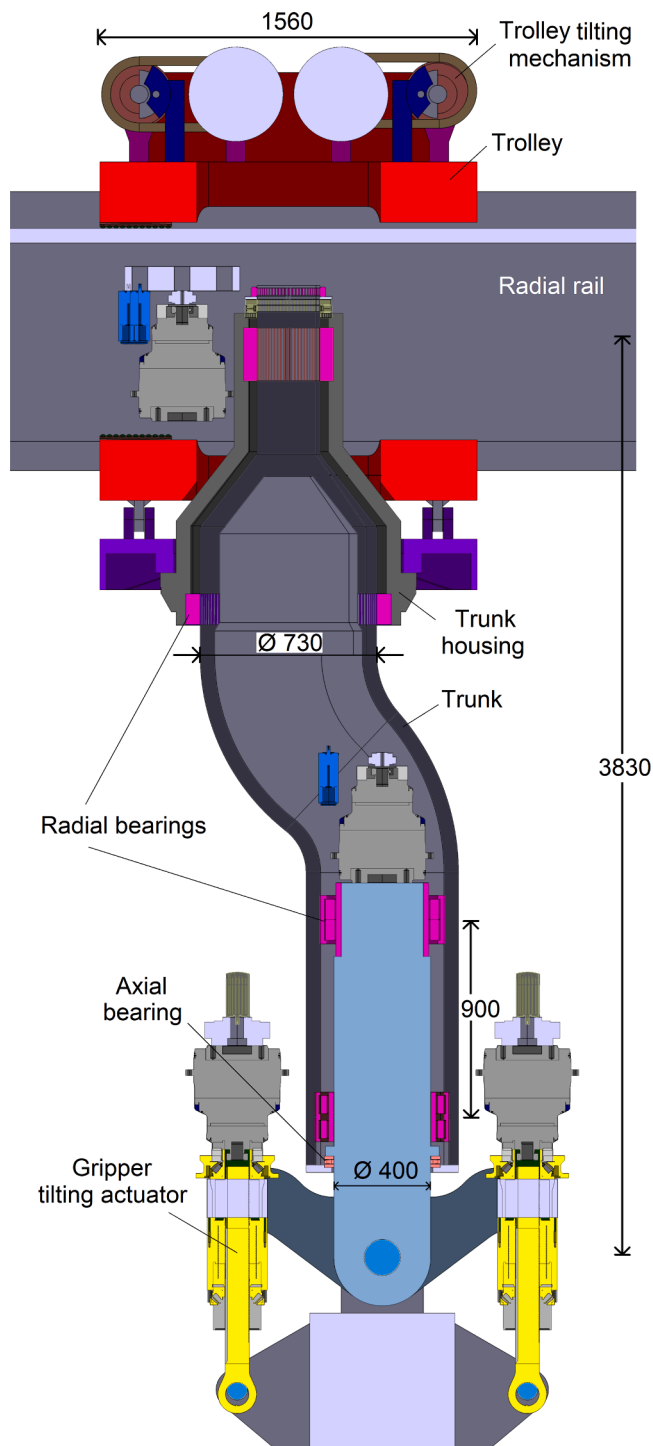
Vertical section of the trunk with radial and axial bearings (pink) of two rotational joints: to the gripper on the bottom and to the trunk housing at the top (interface to BB (blue) indicatively), dimensions in [mm].
